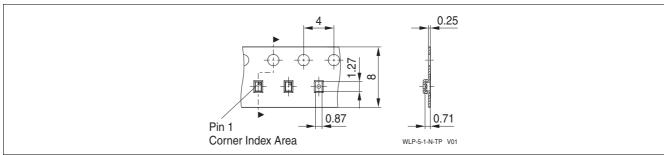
Tape for WLP-5-1 (dimensions in mm)
